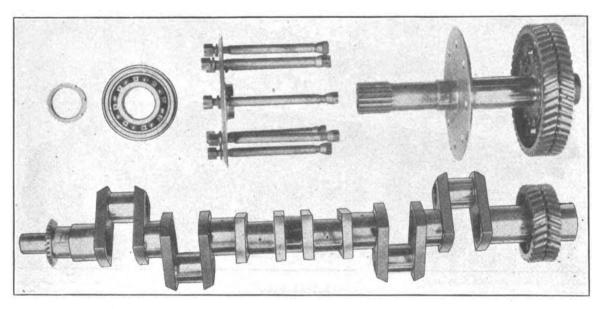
Crankshaft, reduction gear, propeller shaft, and propeller hub.
